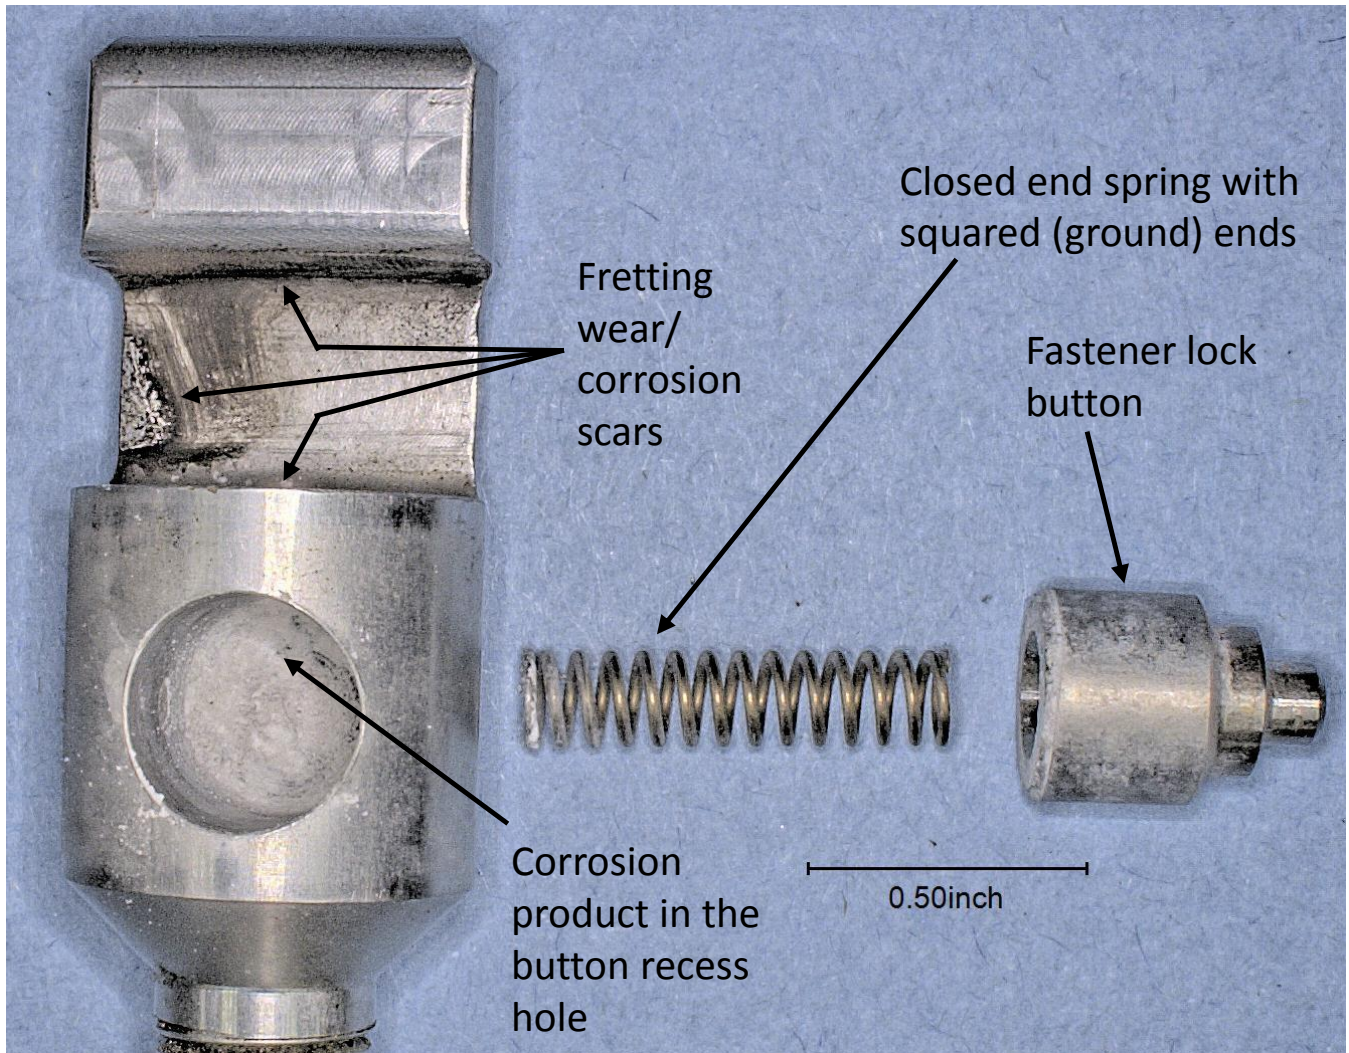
Closer image showing the fastener lock button, retraction spring, and bolt connector. Note the presence of white corrosion product in the button recess hole.
